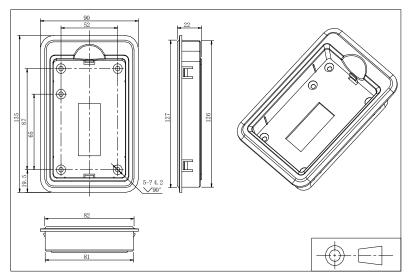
PI550-E Keyboard dimension (mm) PI550-E Keyboard installation open inlet dimension
